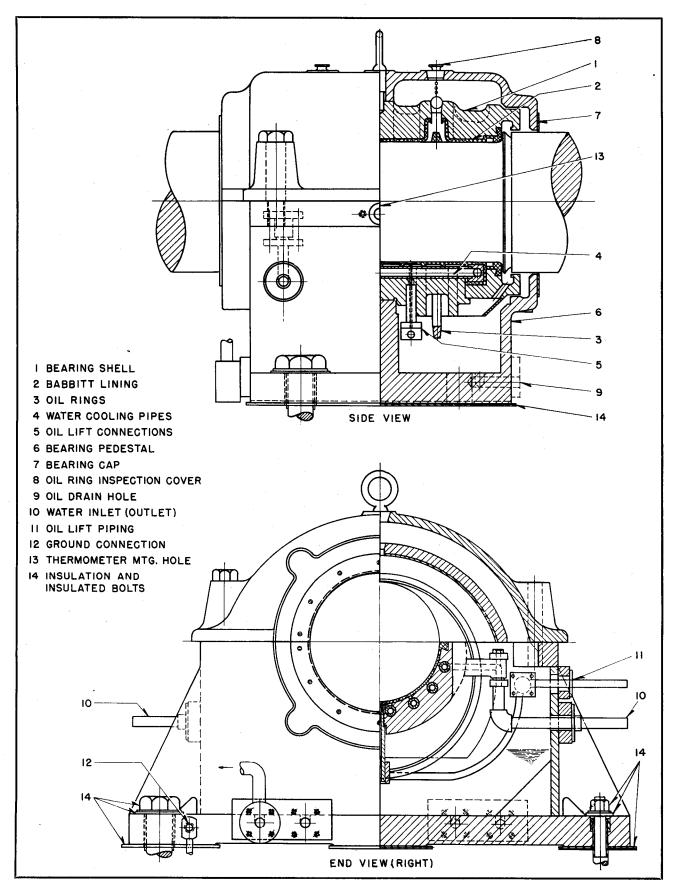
Cross Section Views of a Typical Water-Cooled Bearing Assembly
